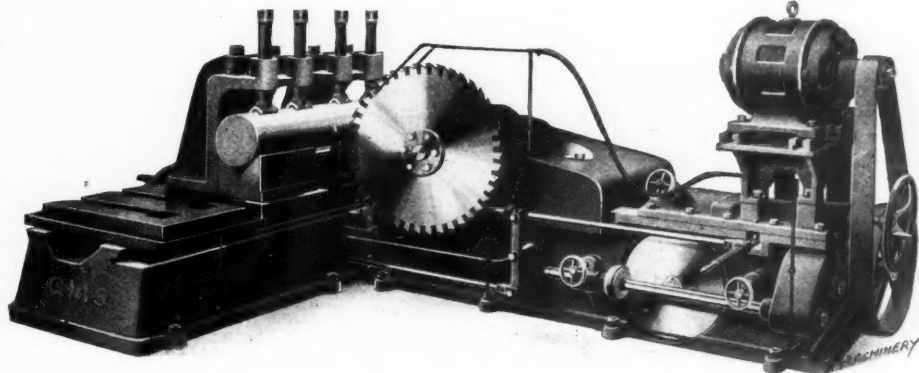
Front View of Q. M. S. Cold Saw shown in Fig. 1
